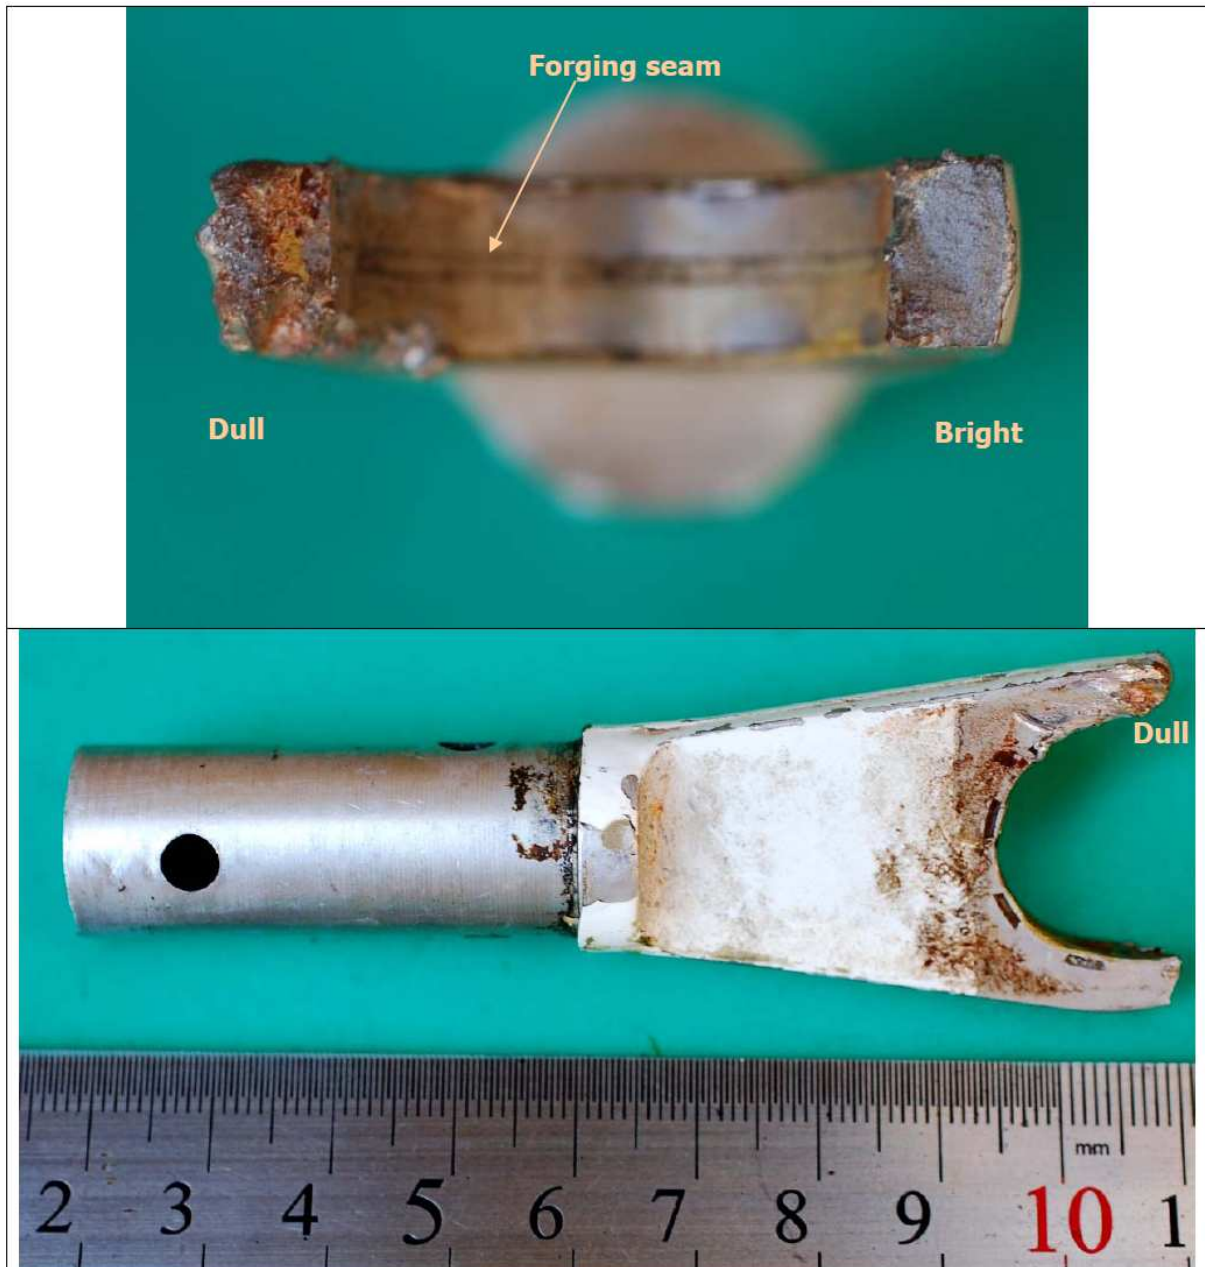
As-received condition of the landing gear tie end remnant with two single sided fracture surfaces respectively referred to as dull and bright.
